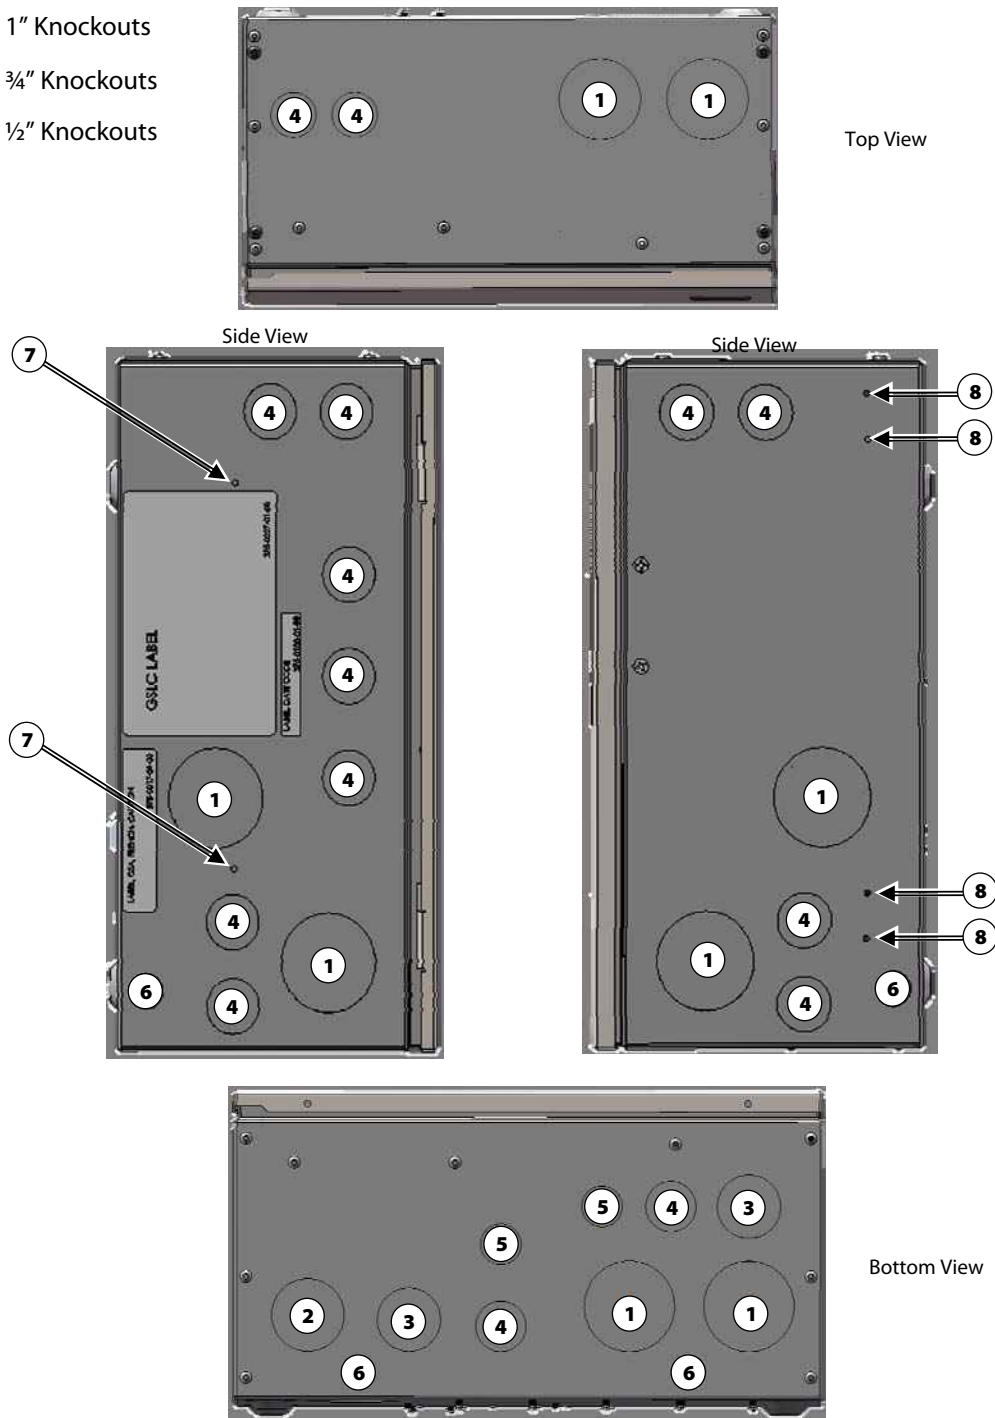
Knockouts and Mounting Holes for FLEXmax and HUB
